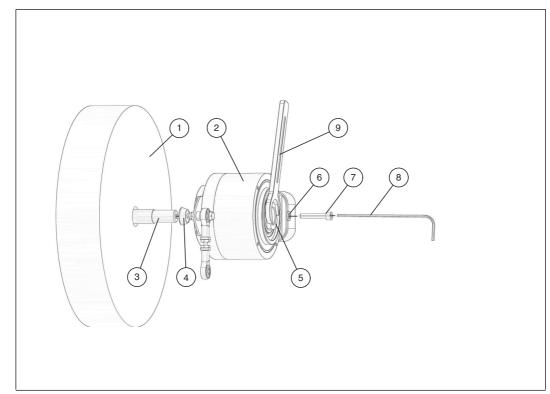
Mounting of a rotary encoder with recessed hollow shaft (the rear rotary encoder cover is already removed in the illustration)
